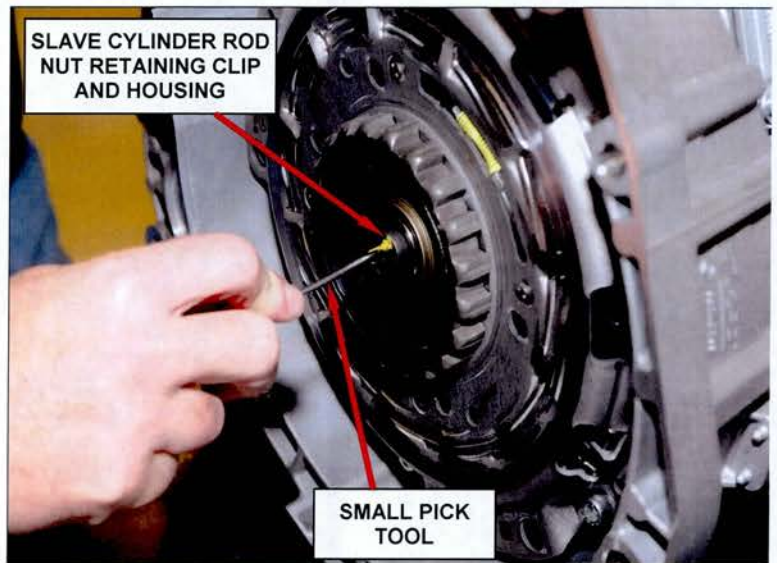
Remove the Slave Cylinder Rod Nut Retaining Clip and Housing
